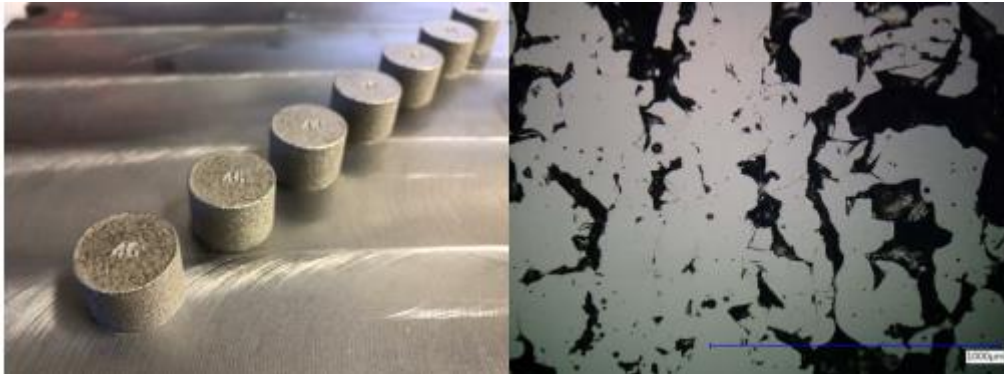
Intact amorphous cylindrical samples manufactured in SLM test campaign (left) and microsection of one of the samples revealing internal porosity and micro-cracking (right).
